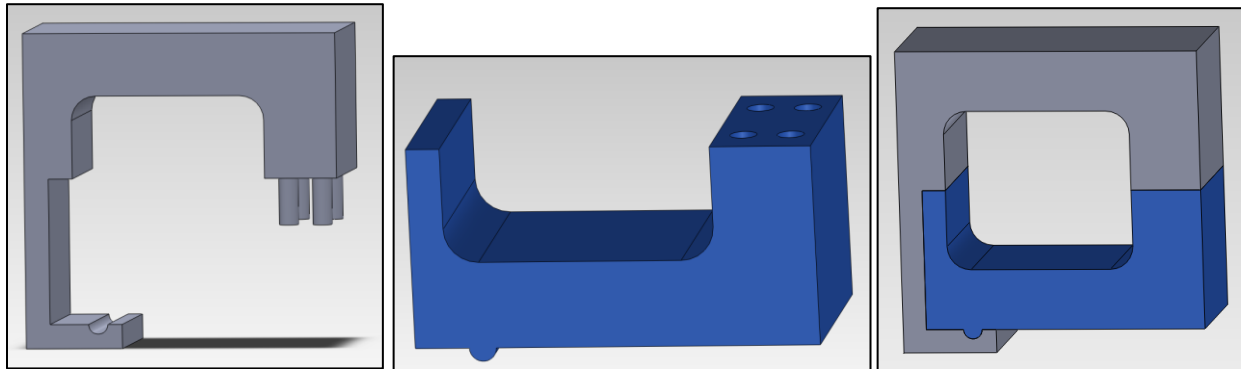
Modified "LEGO®" Based Clamp; Separate Components and Assembly
